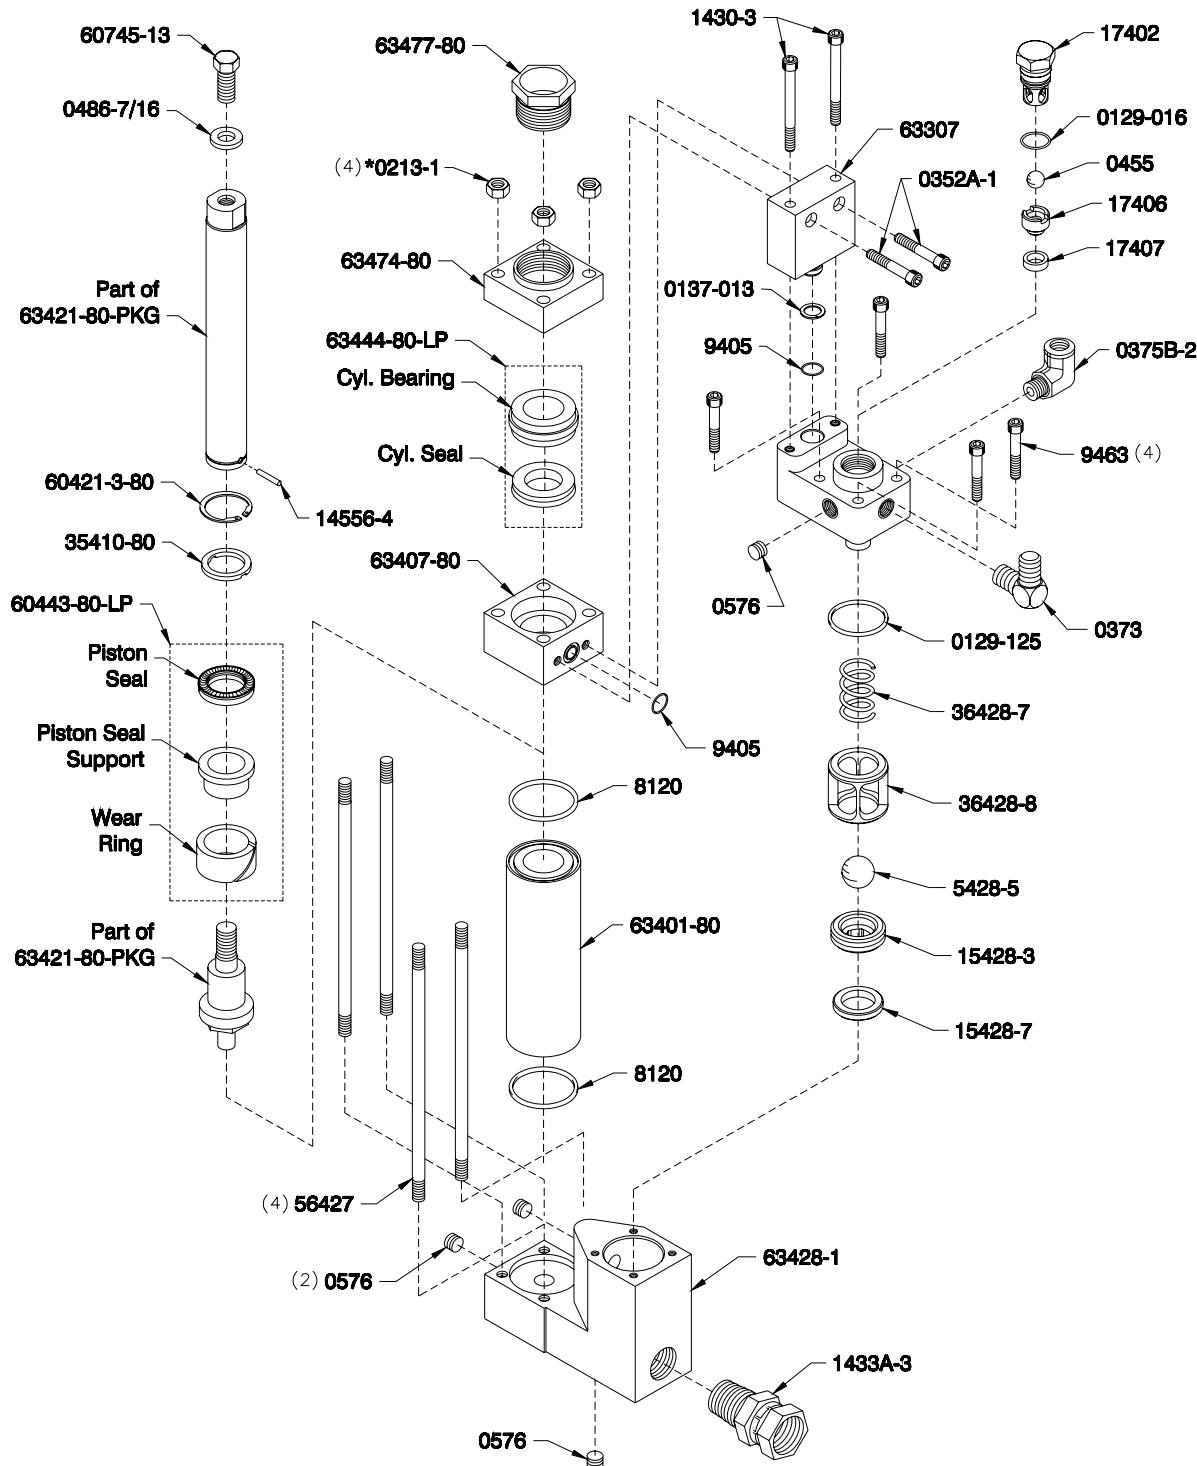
R-Proportioning Pump Assembly (Part No. 63400-80), Exploded View
